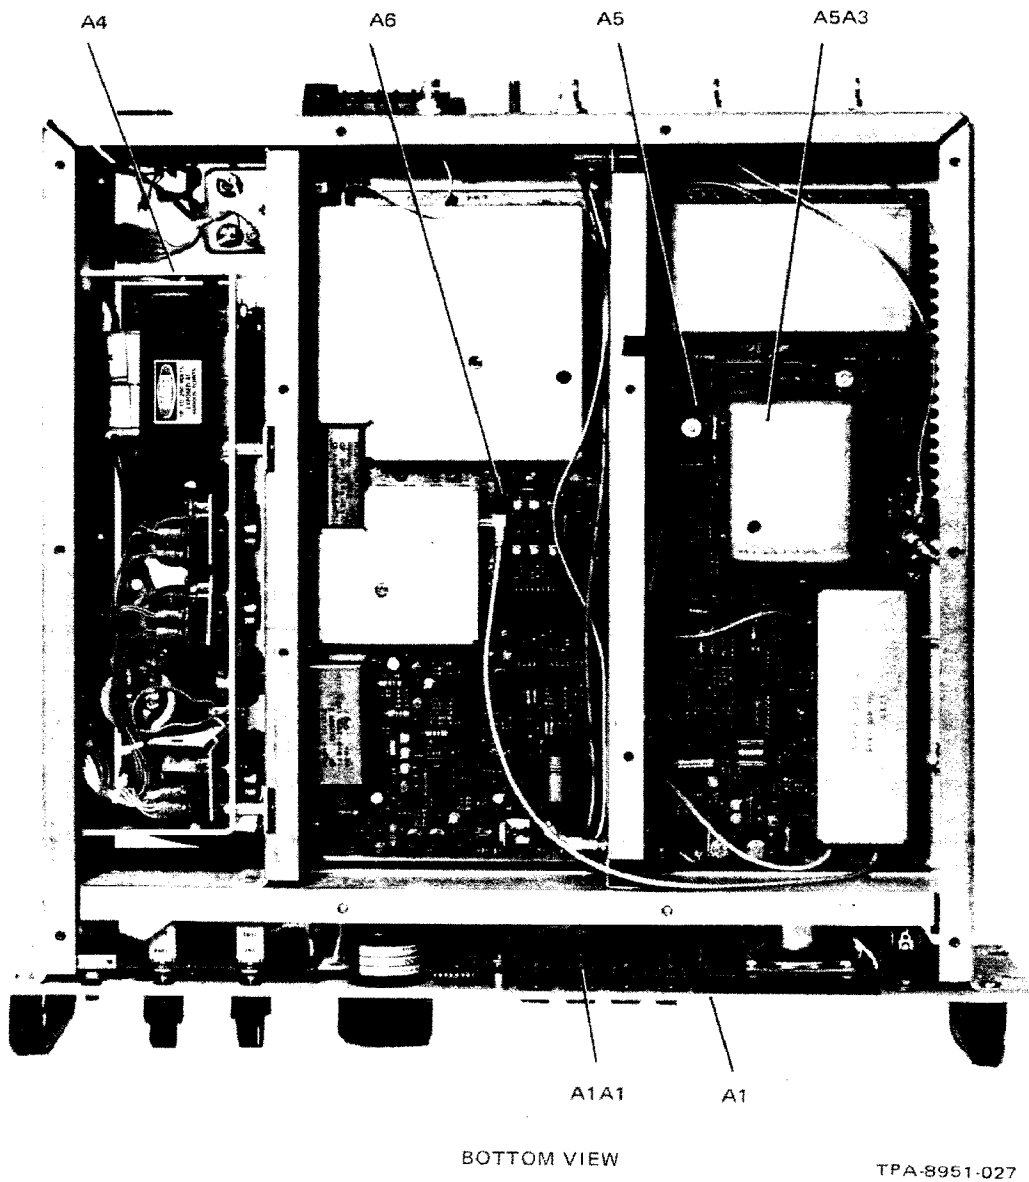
(Sheet 2 of 2) Location of Subassemblies/Circuit Cards
